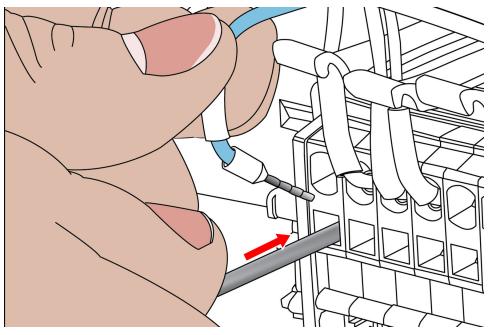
Use a flat-blade screwdriver to open the terminal clip and insert the wire.
